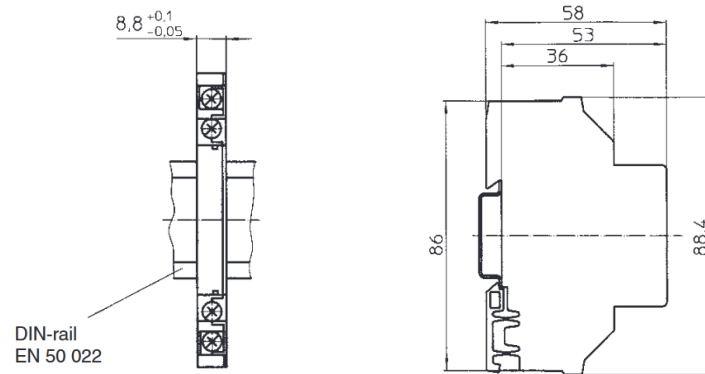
Case drawing of the RAIL-STICK. All dimensions in mm.
